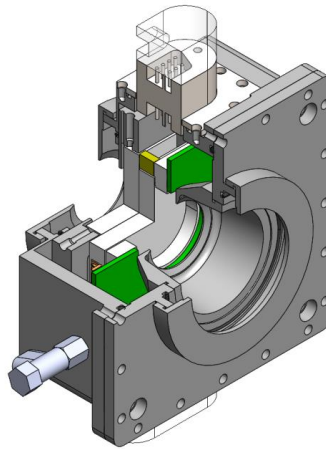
The low-pressure FPI housing rotated 90° about the optical axis, and with a section cut out.
